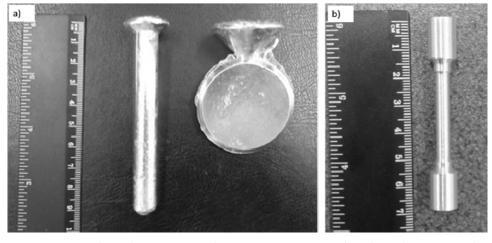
Casted tensile test piece and coin test piece (a), machined tensile test piece (b)
